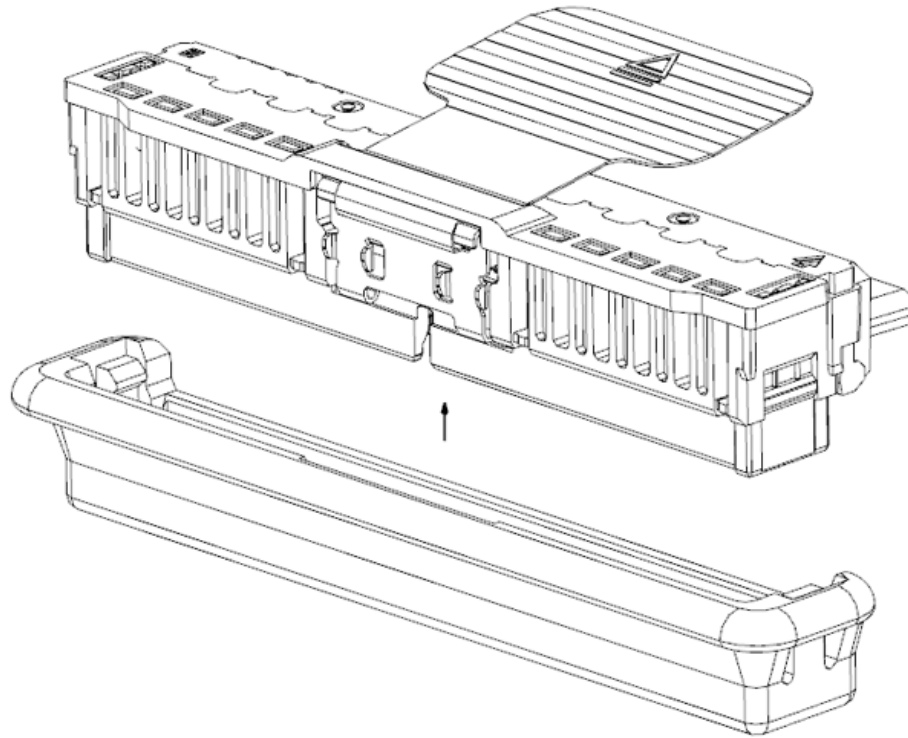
Free-Side Connector & Dust Cover Assembly Direction
